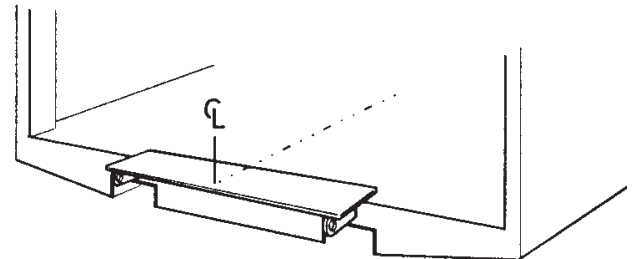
Bolt or spot-weld the mounting jig to the rear beam. Art.no. 51724TL
